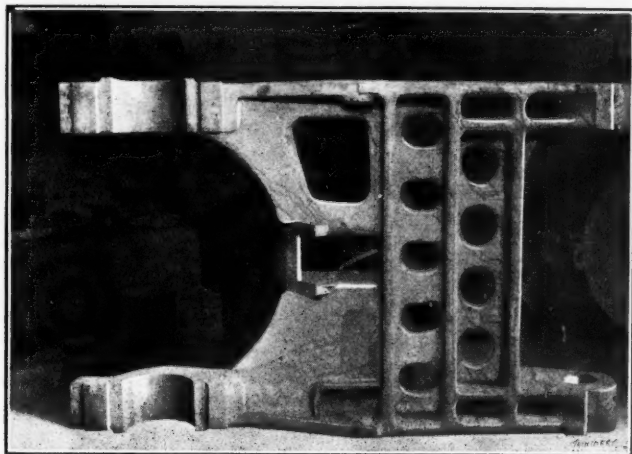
Disappearing Mortar Carriage Casting being bored in Fig. 2
